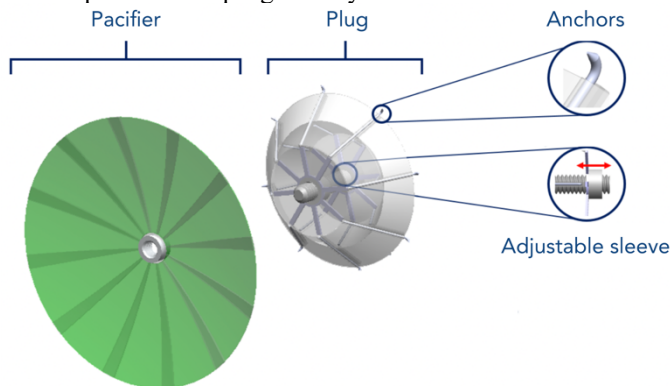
EXPLODED VIEW RENDERING OF THE PLUG-PACIFIER DESIGN
